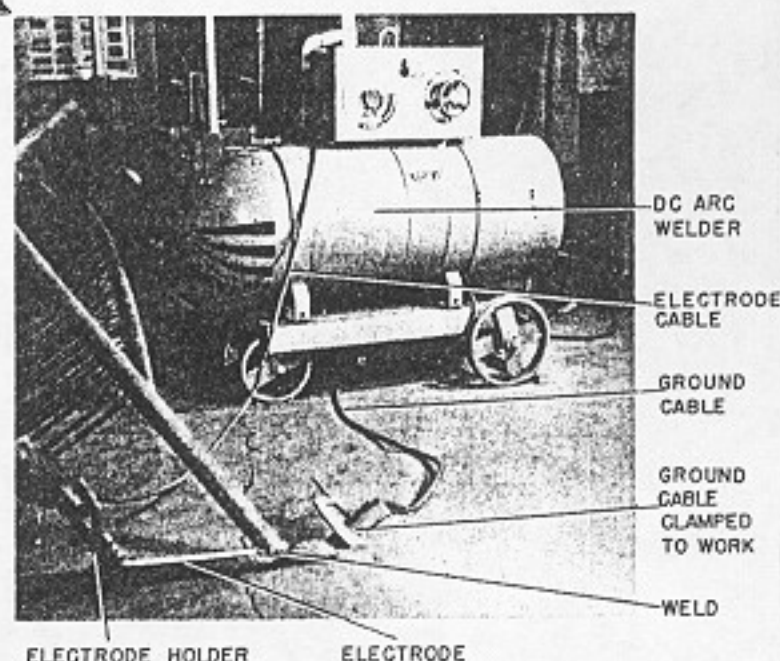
Arc welding is used on heavy metal.
